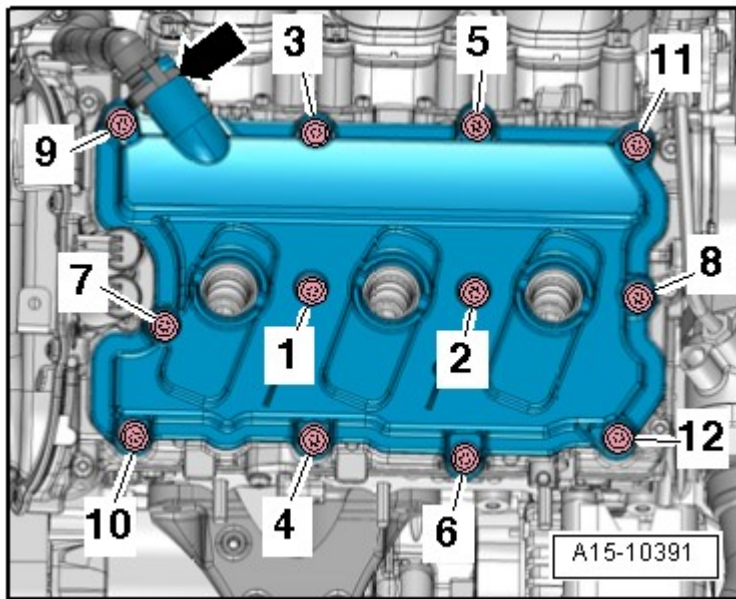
Right Cylinder Head Cover Bolt Tightening Sequence & Specification
